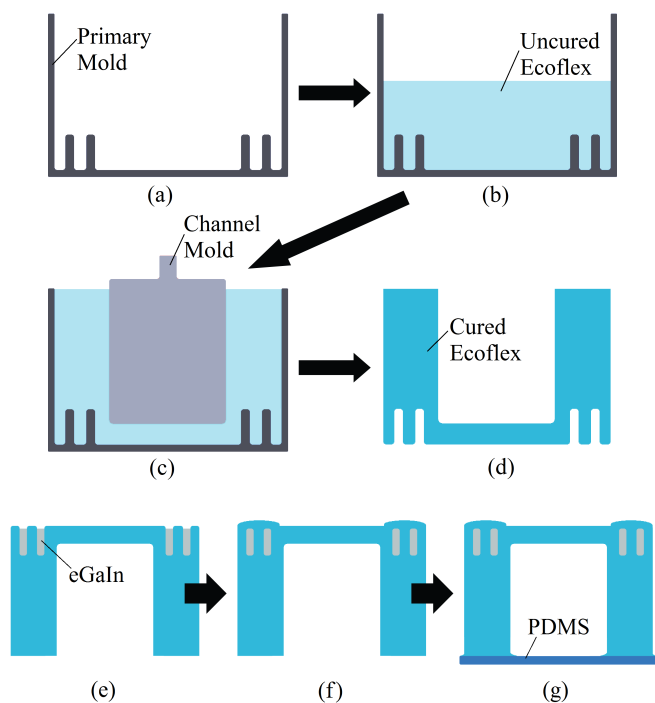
(a) The bottom half of the mold is printed and (b) filled with liquid elastomer. (c) The channel mold (previously printed) is embedded inside the liquid elastomer to create the pneumatic channels. When the elastomer has cured (d) the mold can be removed from around it. To finish the sensors, (e) the eGaIn channels are filled with liquid metal and (f) sealed with liquid elastomer. Finally, (g) the pneumatic channels are sealed by bonding the tube to a thin layer of Silgard 184.
